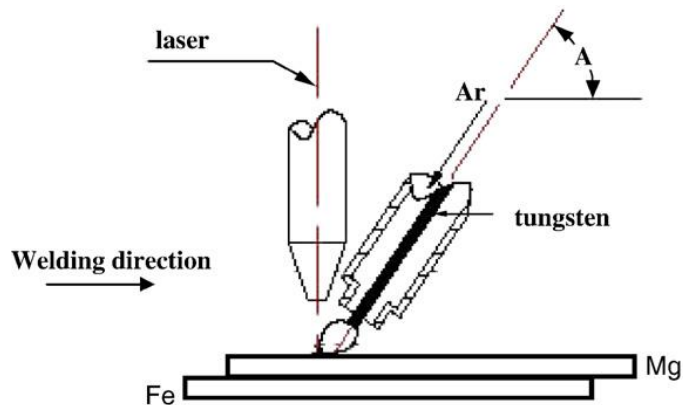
Schematic of laser-GTA hybrid welding (taken from Liu and Zhao [7]).
